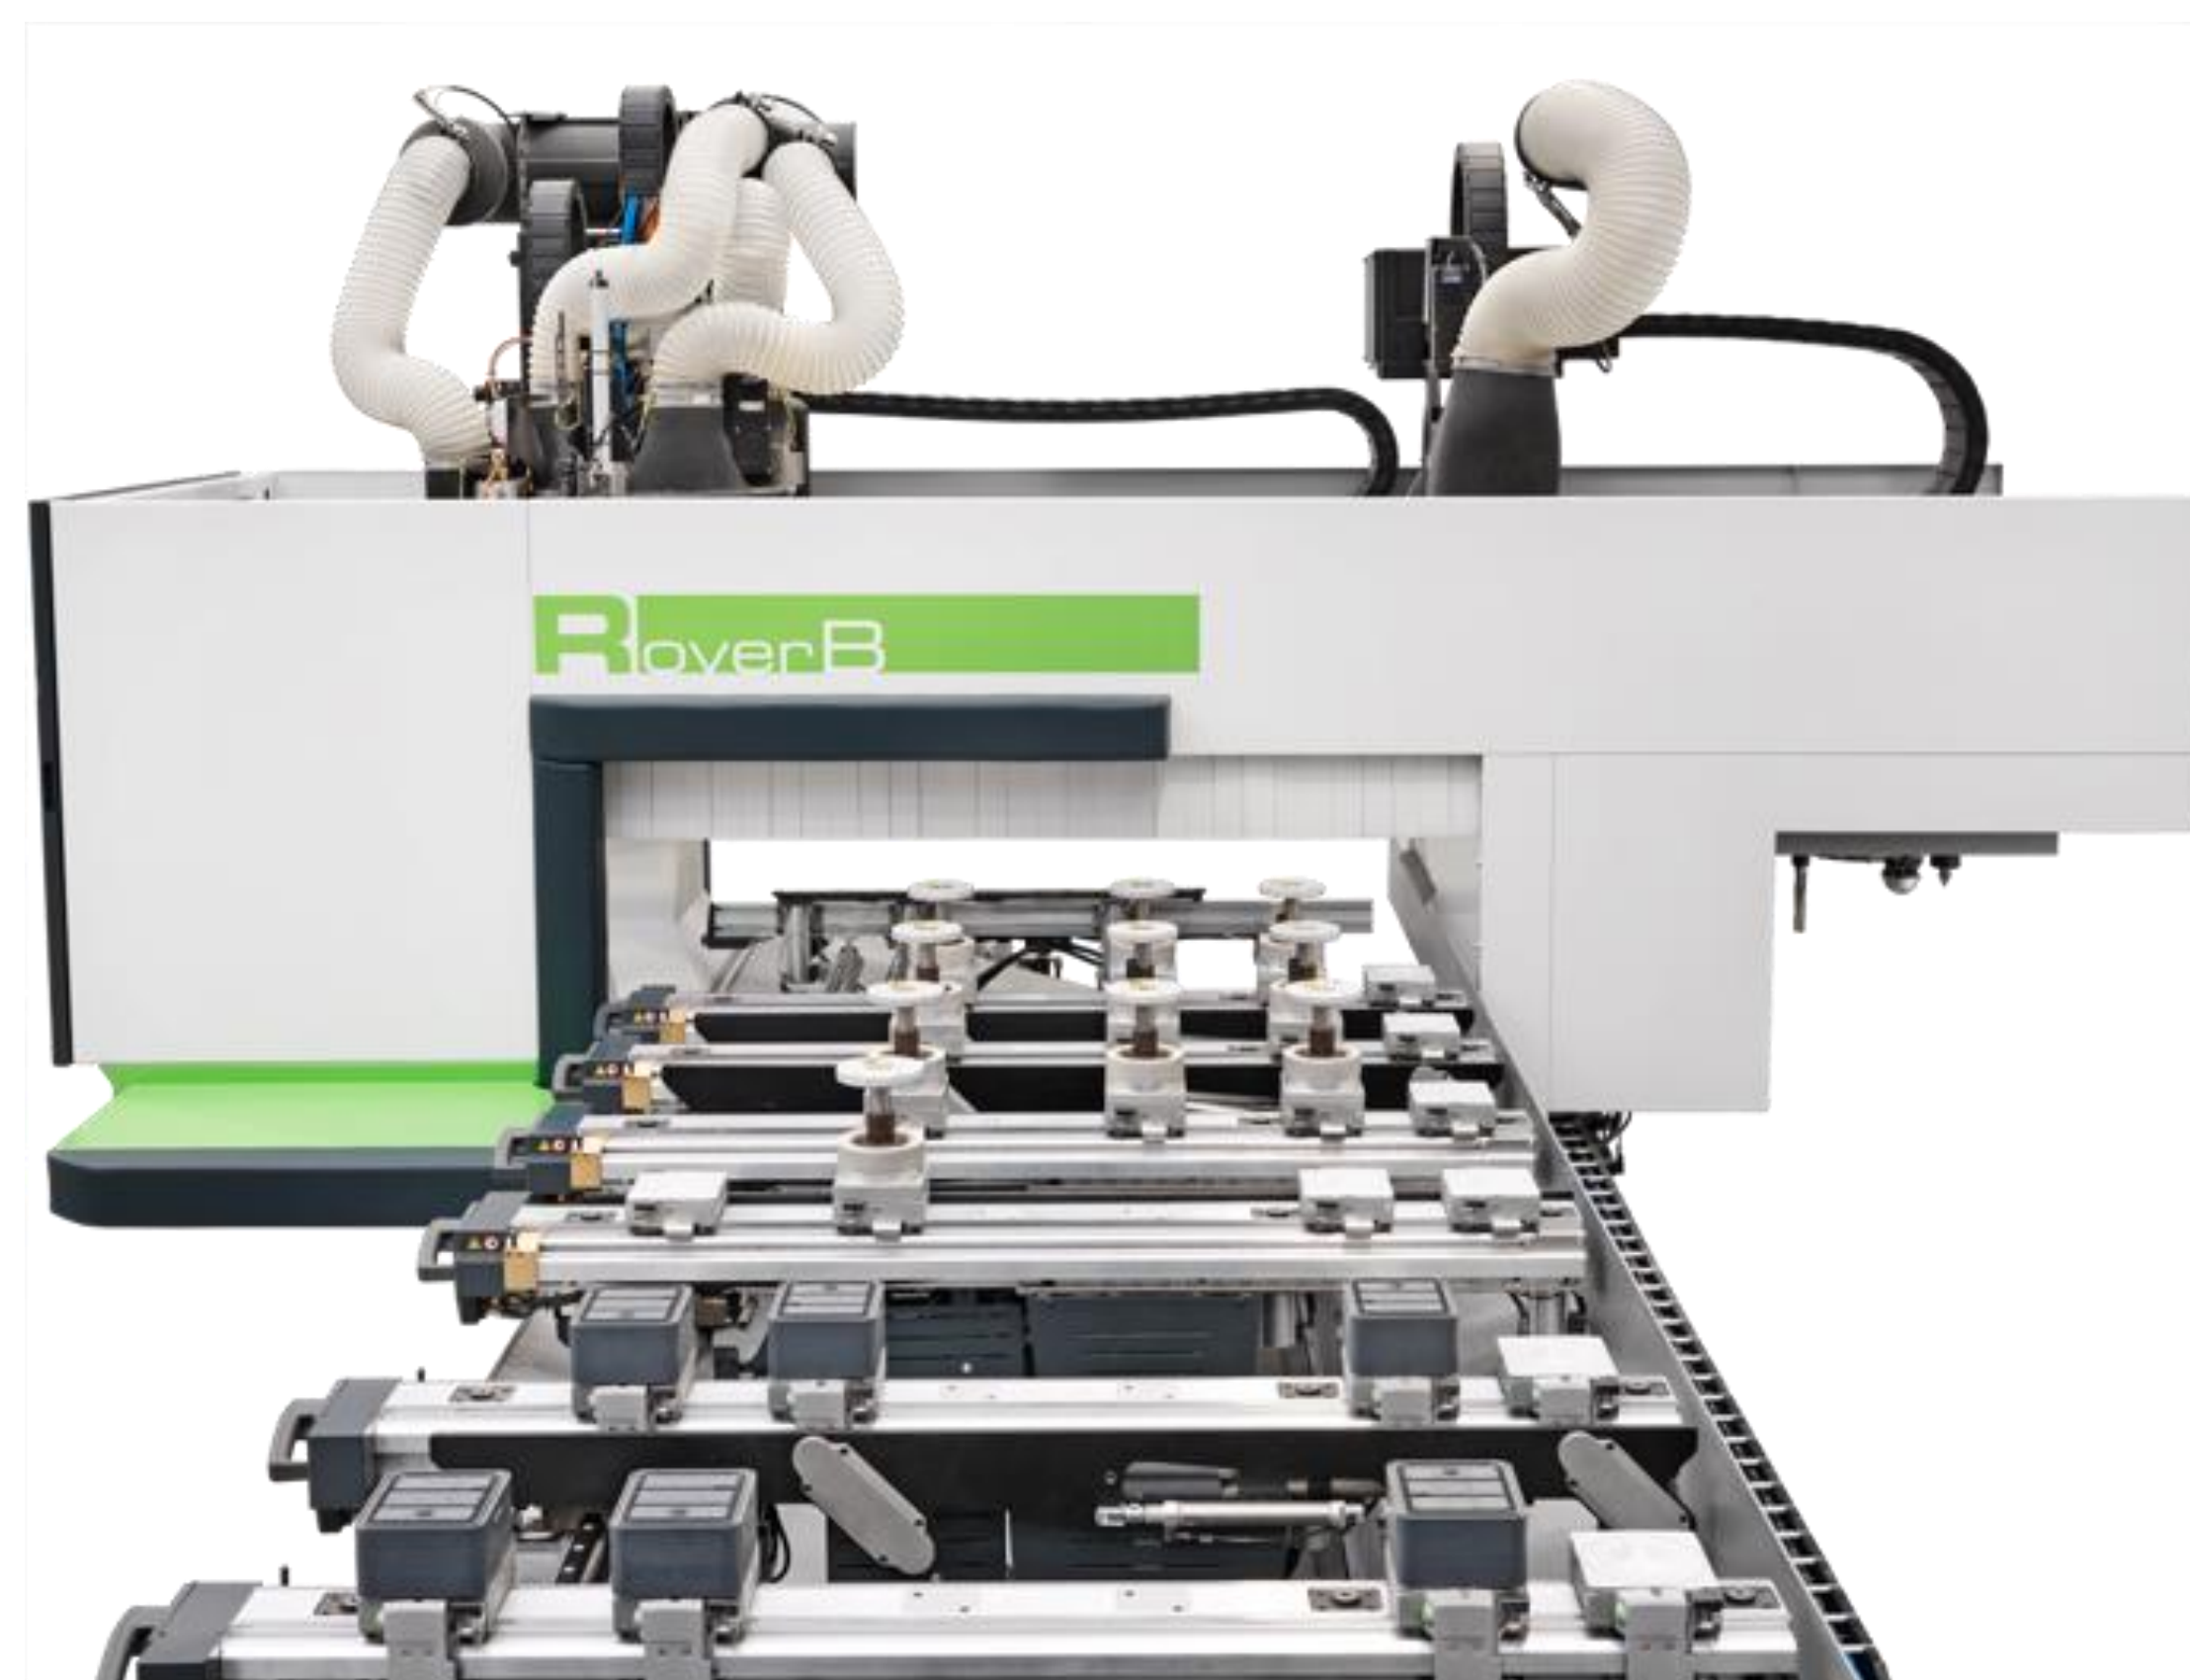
Biesse Rover B, the target CNC machine being developed for.
